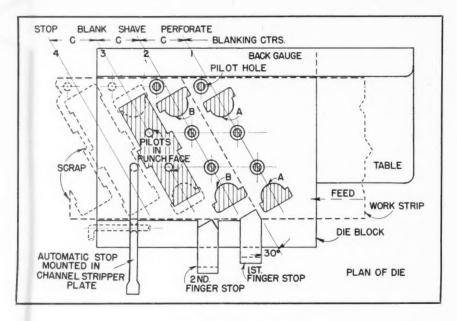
Sketch of a four-station die for shaving both ends and two holes of a sheet metal blank in the same operation with perforating and blanking.
